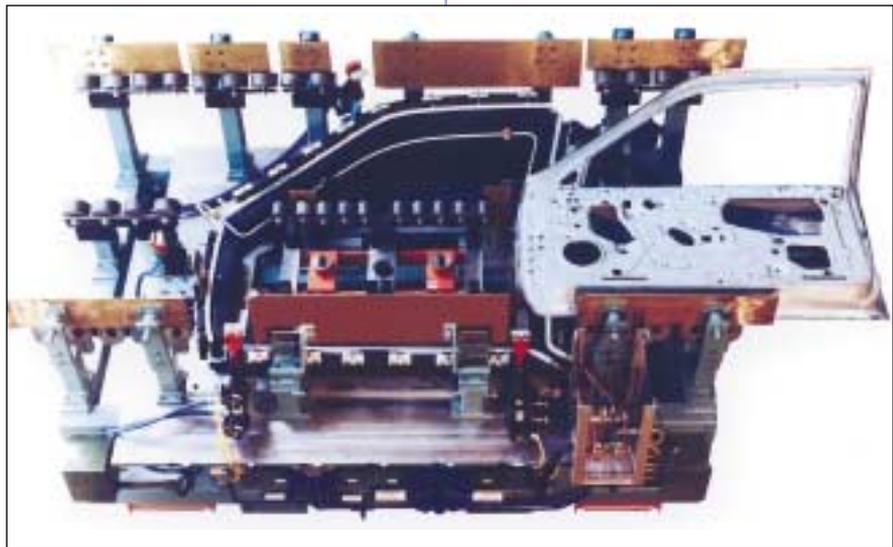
Fixture for full- or partial-periphery cure of adhesive hem bonds in automobile door panels. Note panel lifting mechanism. Photo courtesy Inductoheat.
